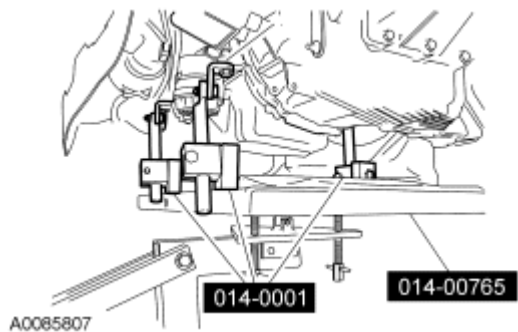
Securing Engine To Lift Table Using Special Tool (014-0001, 014-00765)
